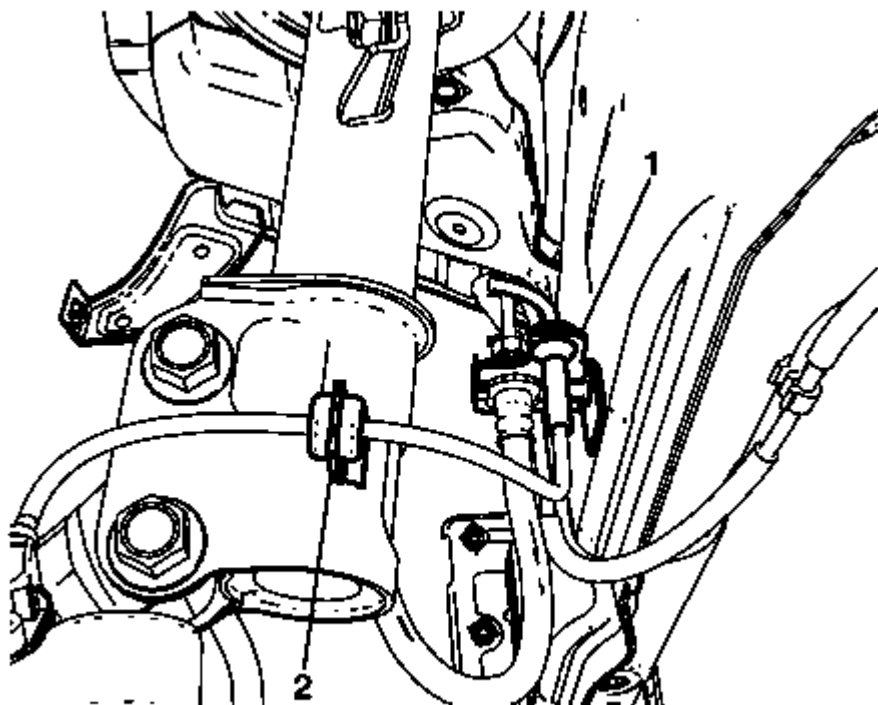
Wheel Speed Sensor Harness And Body Frame Mounted Bracket
